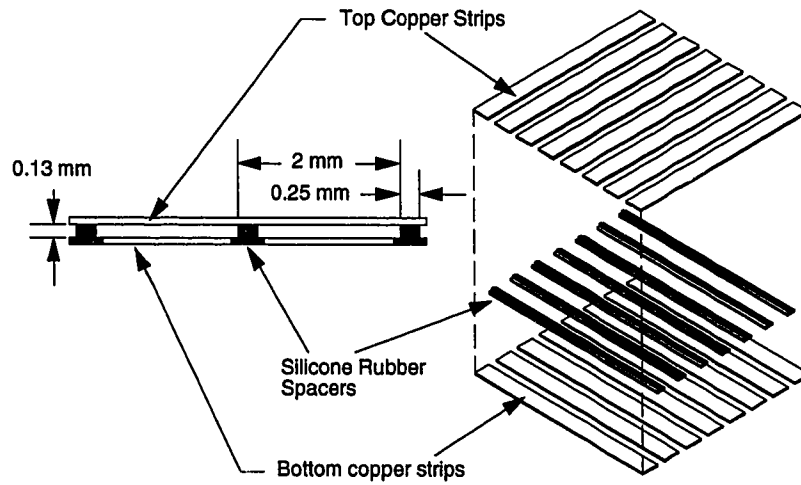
Tactile array sensor. Left: side view; contact occurs on upper surface, compressing silicone rubber and forcing top and bottom copper strips closer together. Right: exploded view showing sensor construction.
